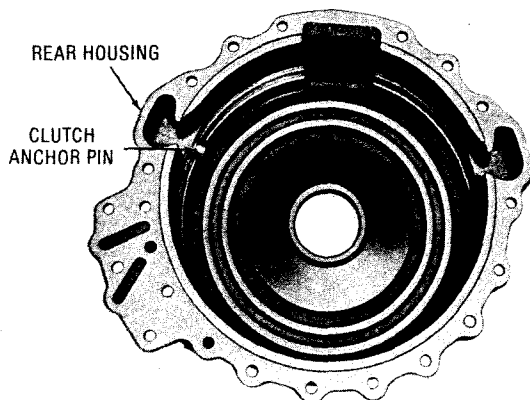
Rear housing and piston assembly (TRT-1)
